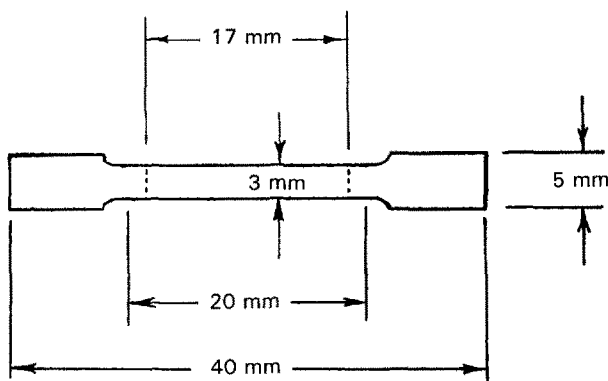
Dimensions of a dogbone shape tensile specimen. The dashed lines indicate the gauge length markings on the specimens.
